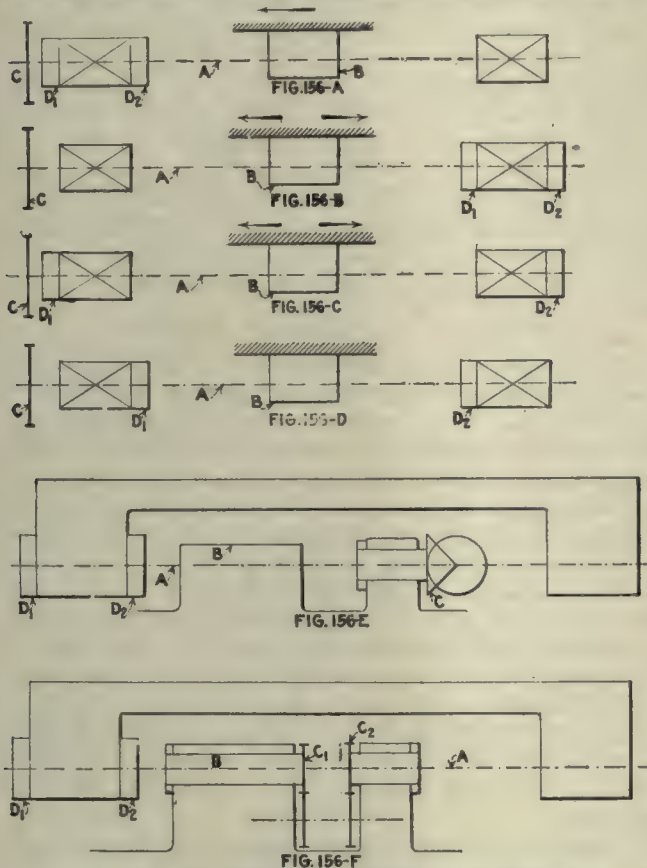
VARIOUS ARRANGEMENTS OF FEED SCREW PARTS
